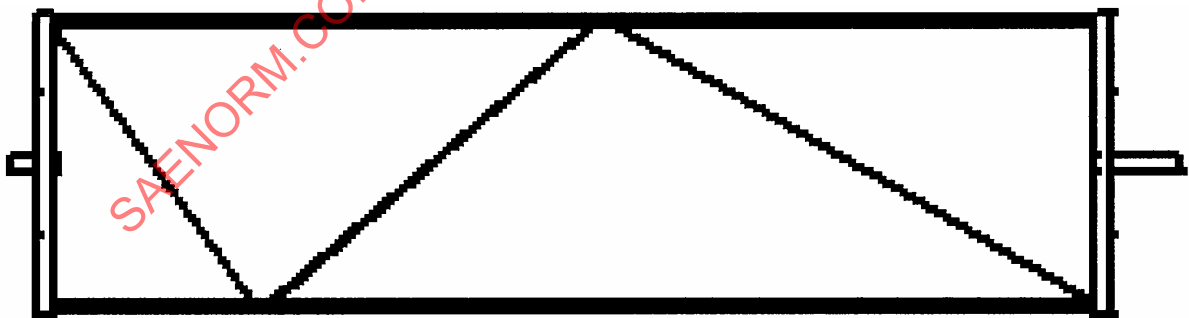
SIDE VIEW OF A Z-FOLD TUNER
